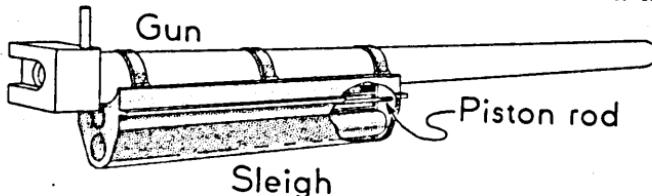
Sleigh, carrying gun and recoil mechanism.
